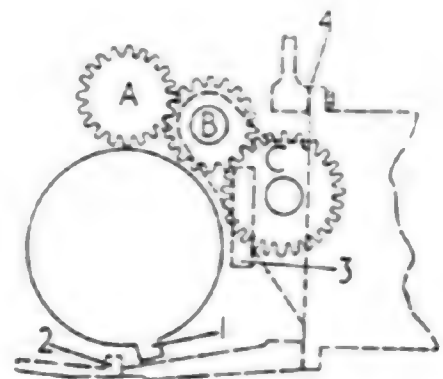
Drawing showing mainshaft gear (A) and transfer case idler gears (B and C).
